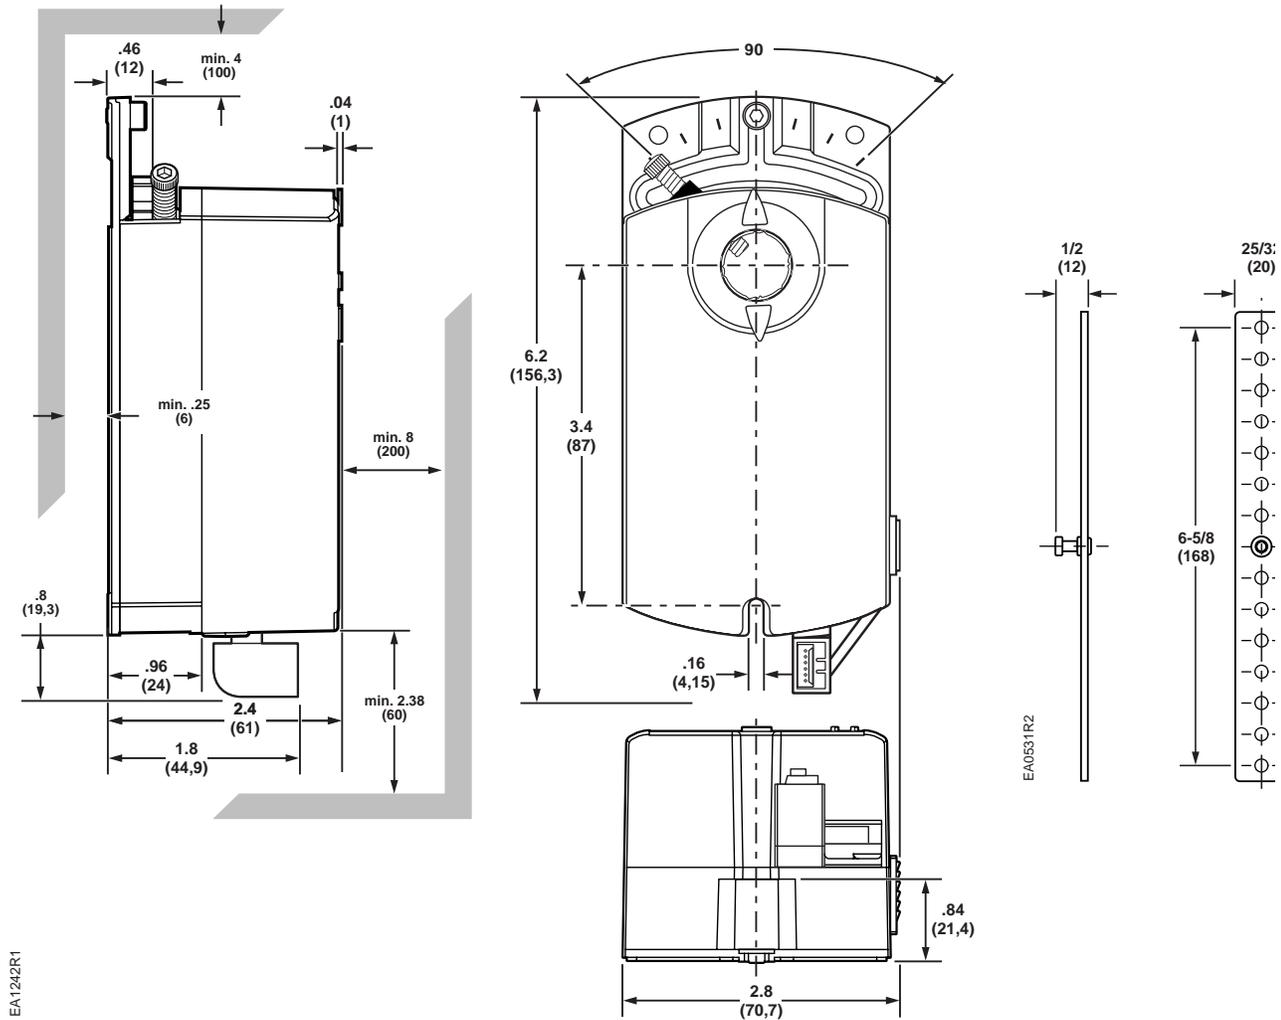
GDE/GLB Actuator and Mounting Bracket Dimensions in Inches (Millimeters).
